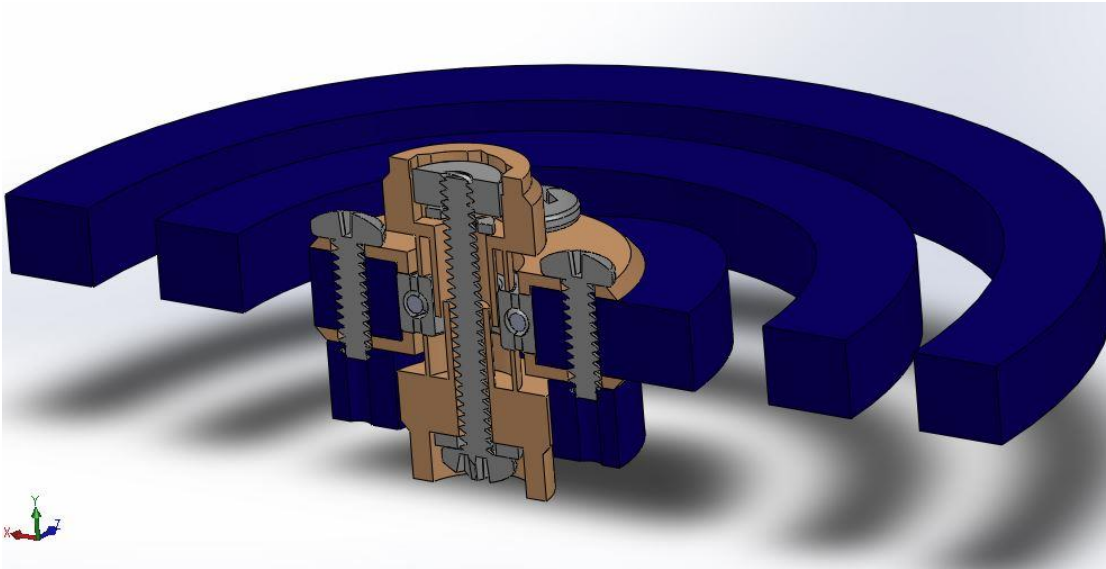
Section view of SolidWorks assembly displaying central bearing and 3D printed bearing clamp design.
